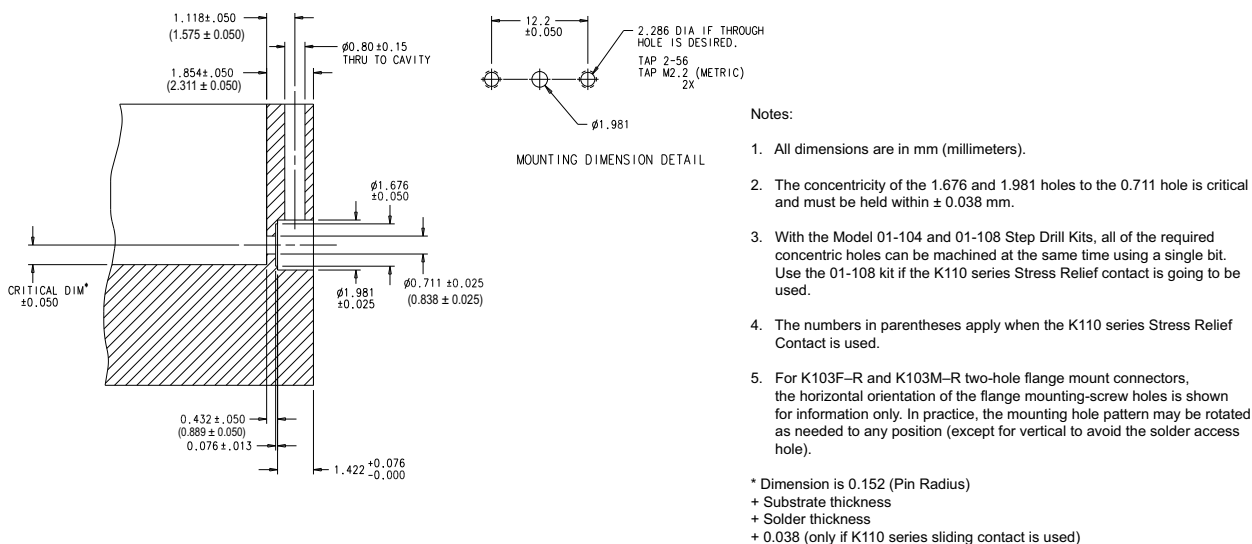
[K103F-R](#) or [EK103F-R](#) Machining Dimensions for the Flange Mount Connector Mounting Holes
